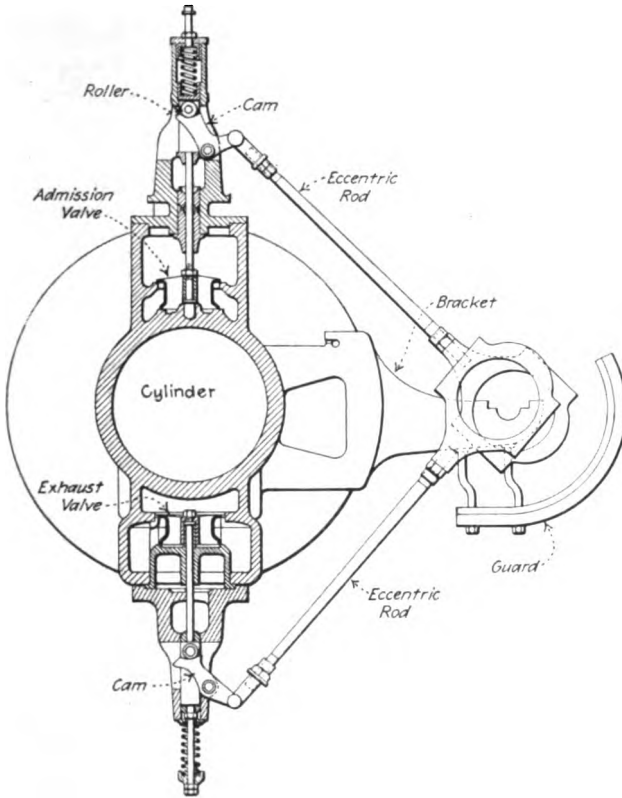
Transverse section through valves of “Lents” engine. (Erie City Iron Works.)
